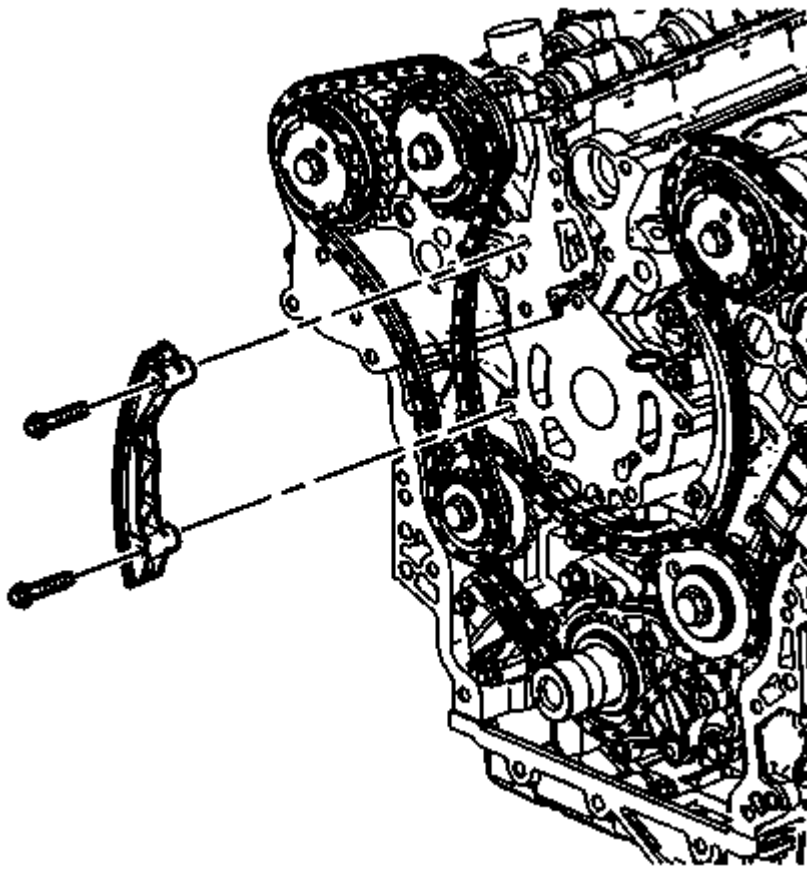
View Of Right Secondary Camshaft Drive Chain Guide & Bolts
